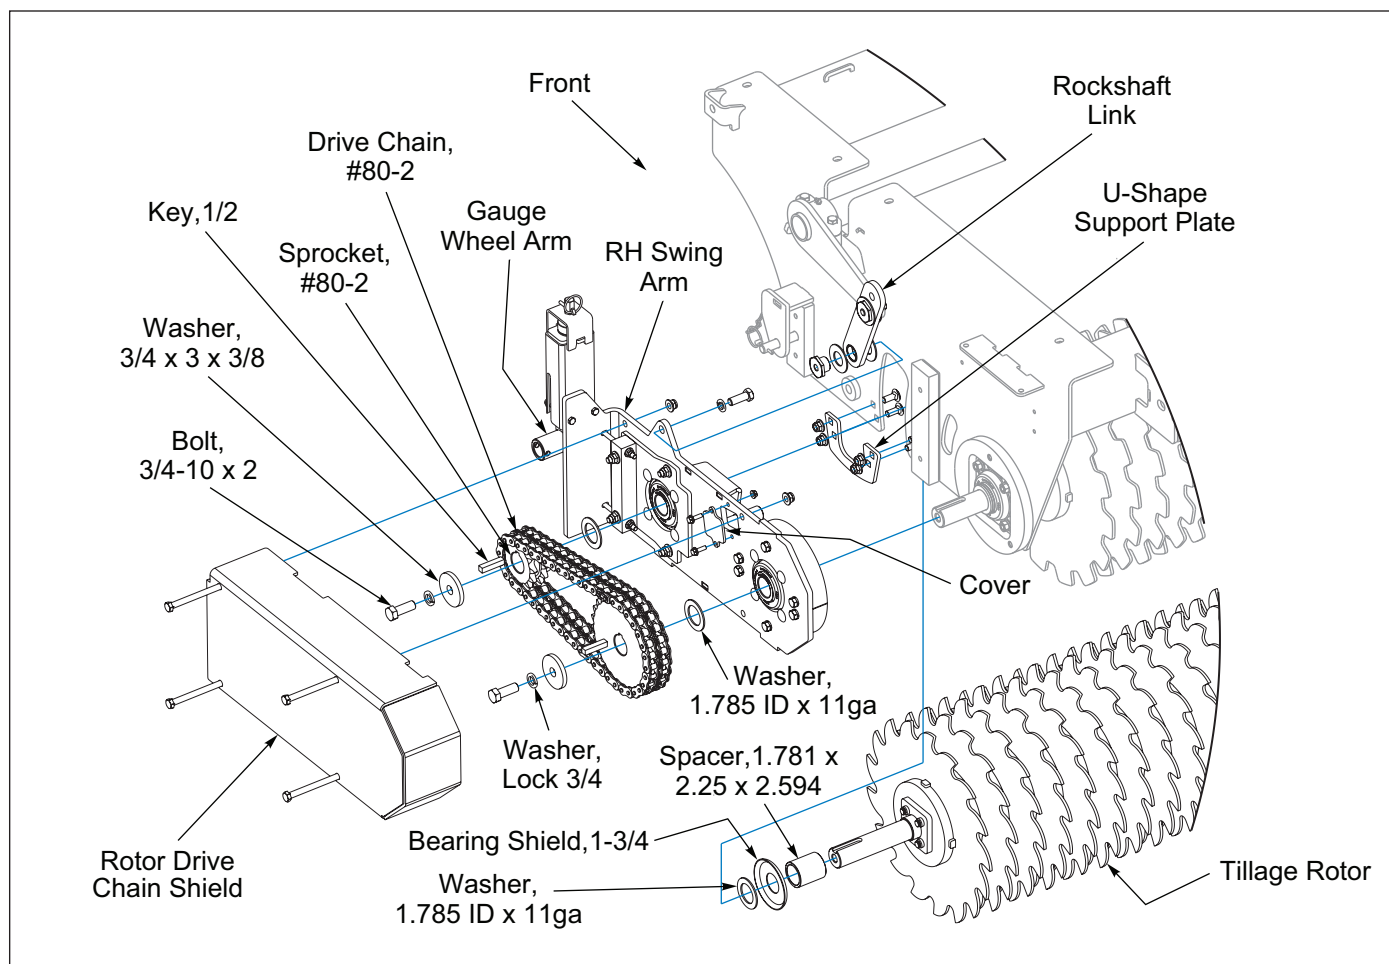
Tillage Rotor Blade Repair - LH Side
